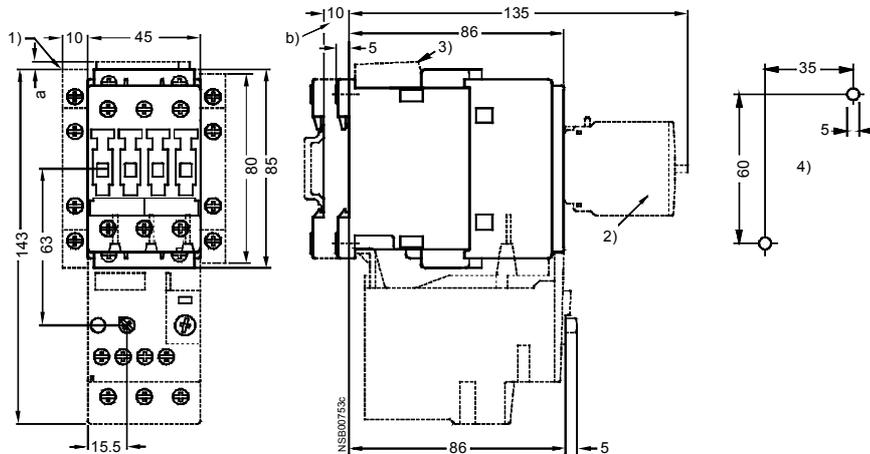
3RT10 2 contactors. 3RT10 2 coupling contactors with surge suppressor, auxiliary contact block and installed overload relay
